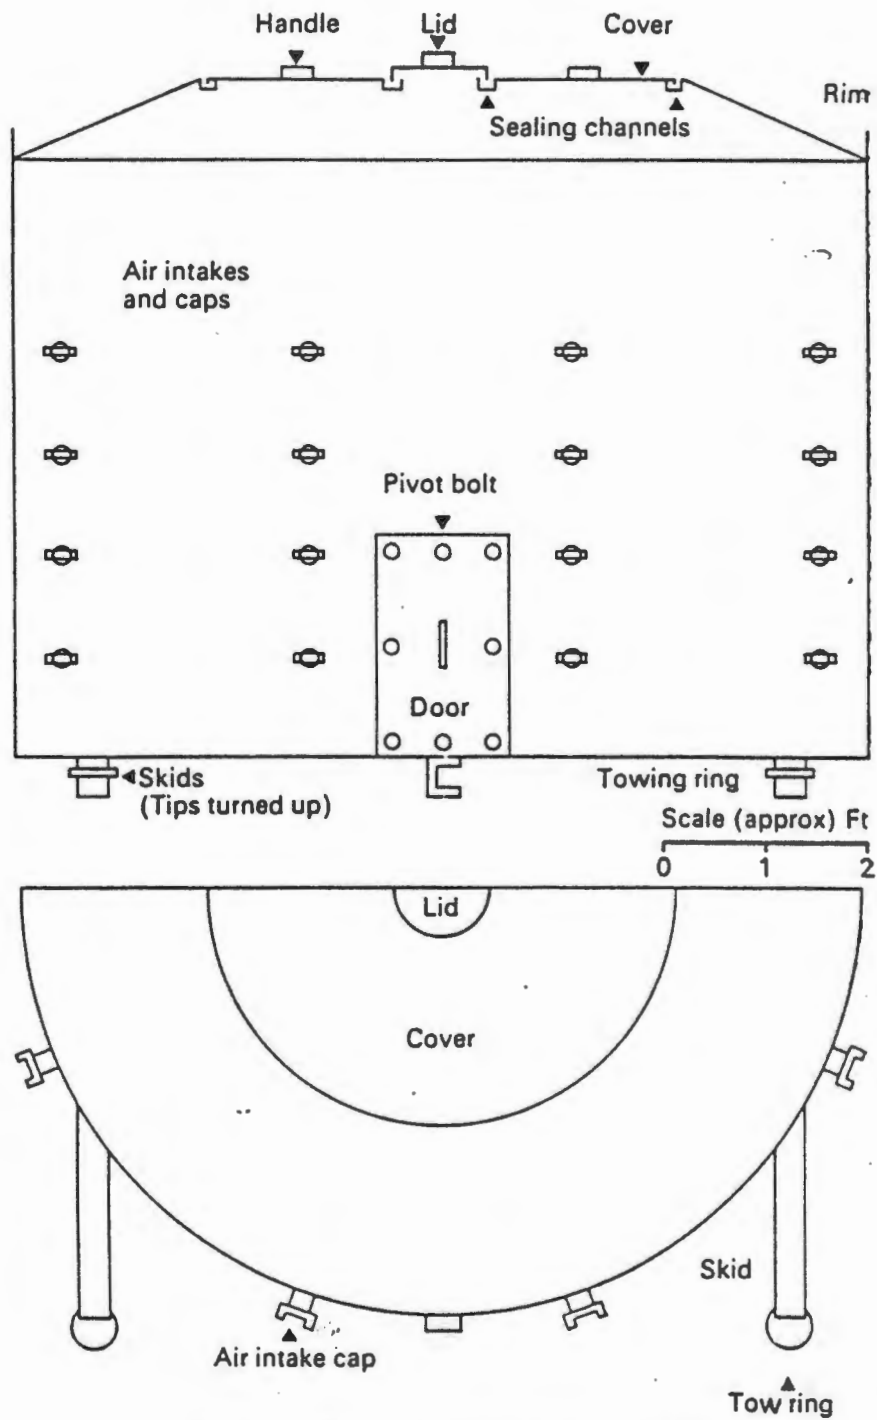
The CUSAB kiln. In elevation (above); plan (below).
